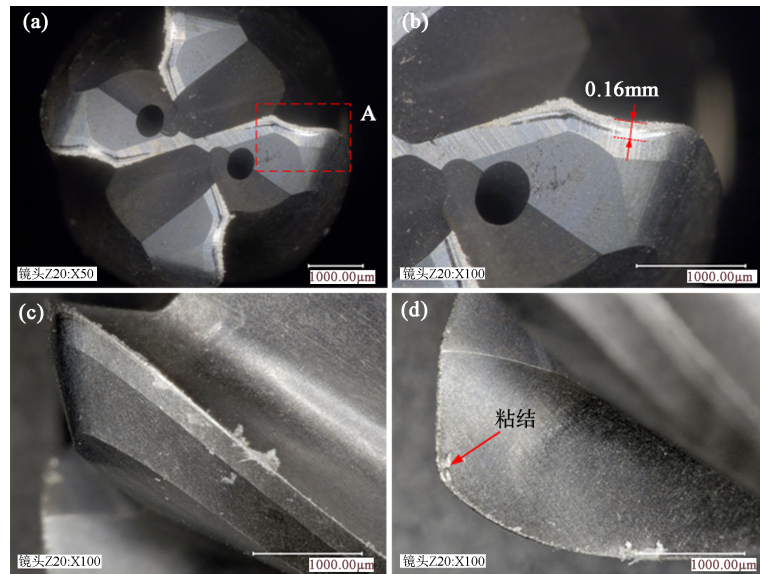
Tool wear morphologies after machining 24 holes with chip collector
